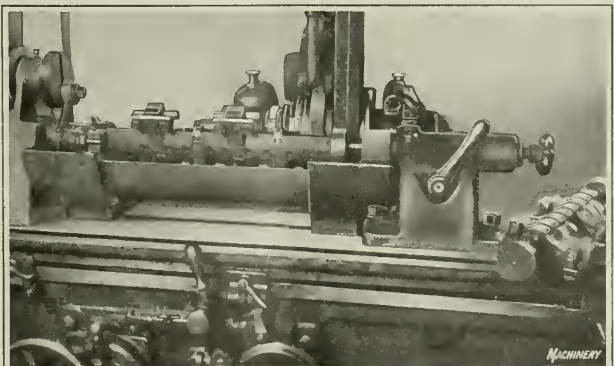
Cylindrical Grinder with Special Equipment for grinding the Curved Surface of Valve Followers
